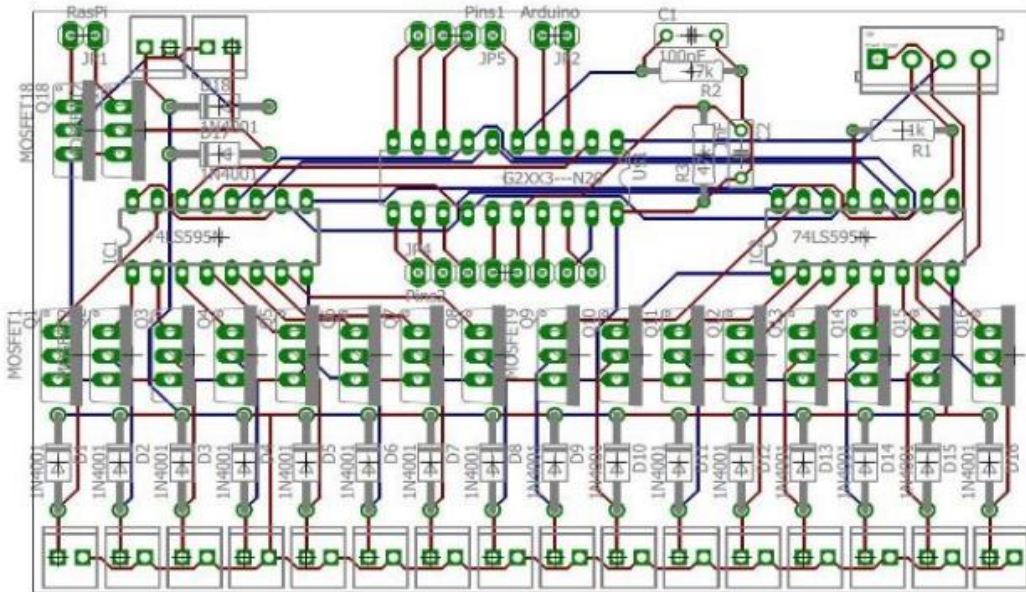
Printed Circuit Board for Solenoid control.
